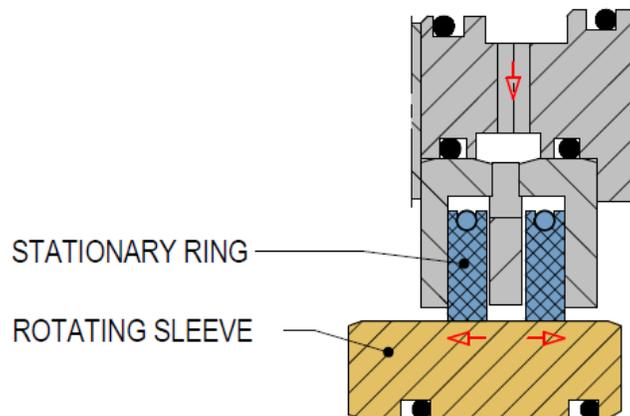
E.6](#)—Separation Seal Contacting Bushing Schematic
